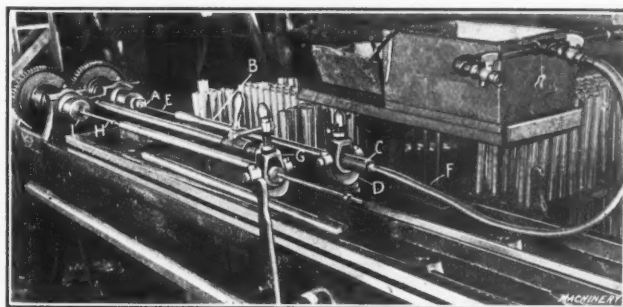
Rough- and Finish-reaming Barrels in a Two-spindle Machine
